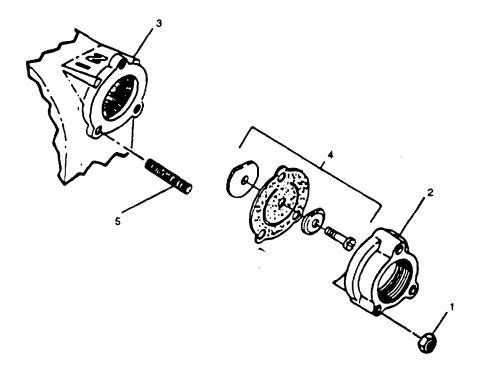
Inlet (Suction) Flange and Check Valve Assembly
